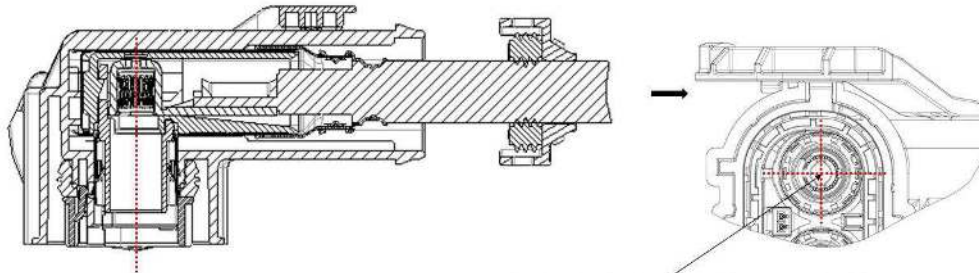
ORIENTED CABLE ASSEMBLY TO HOUSING
